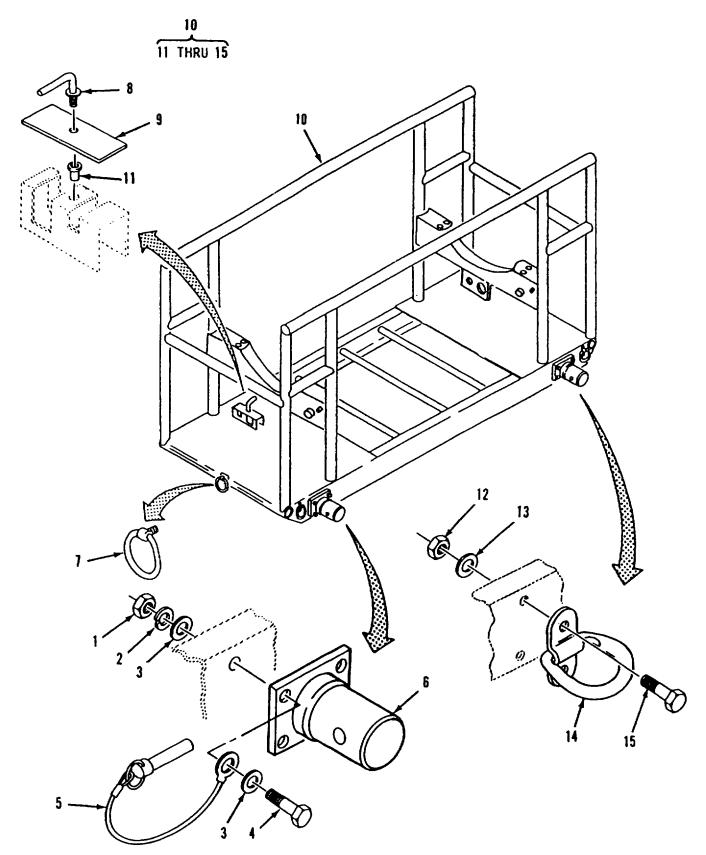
Detent Pin, Running Gear Mount, and Frame
